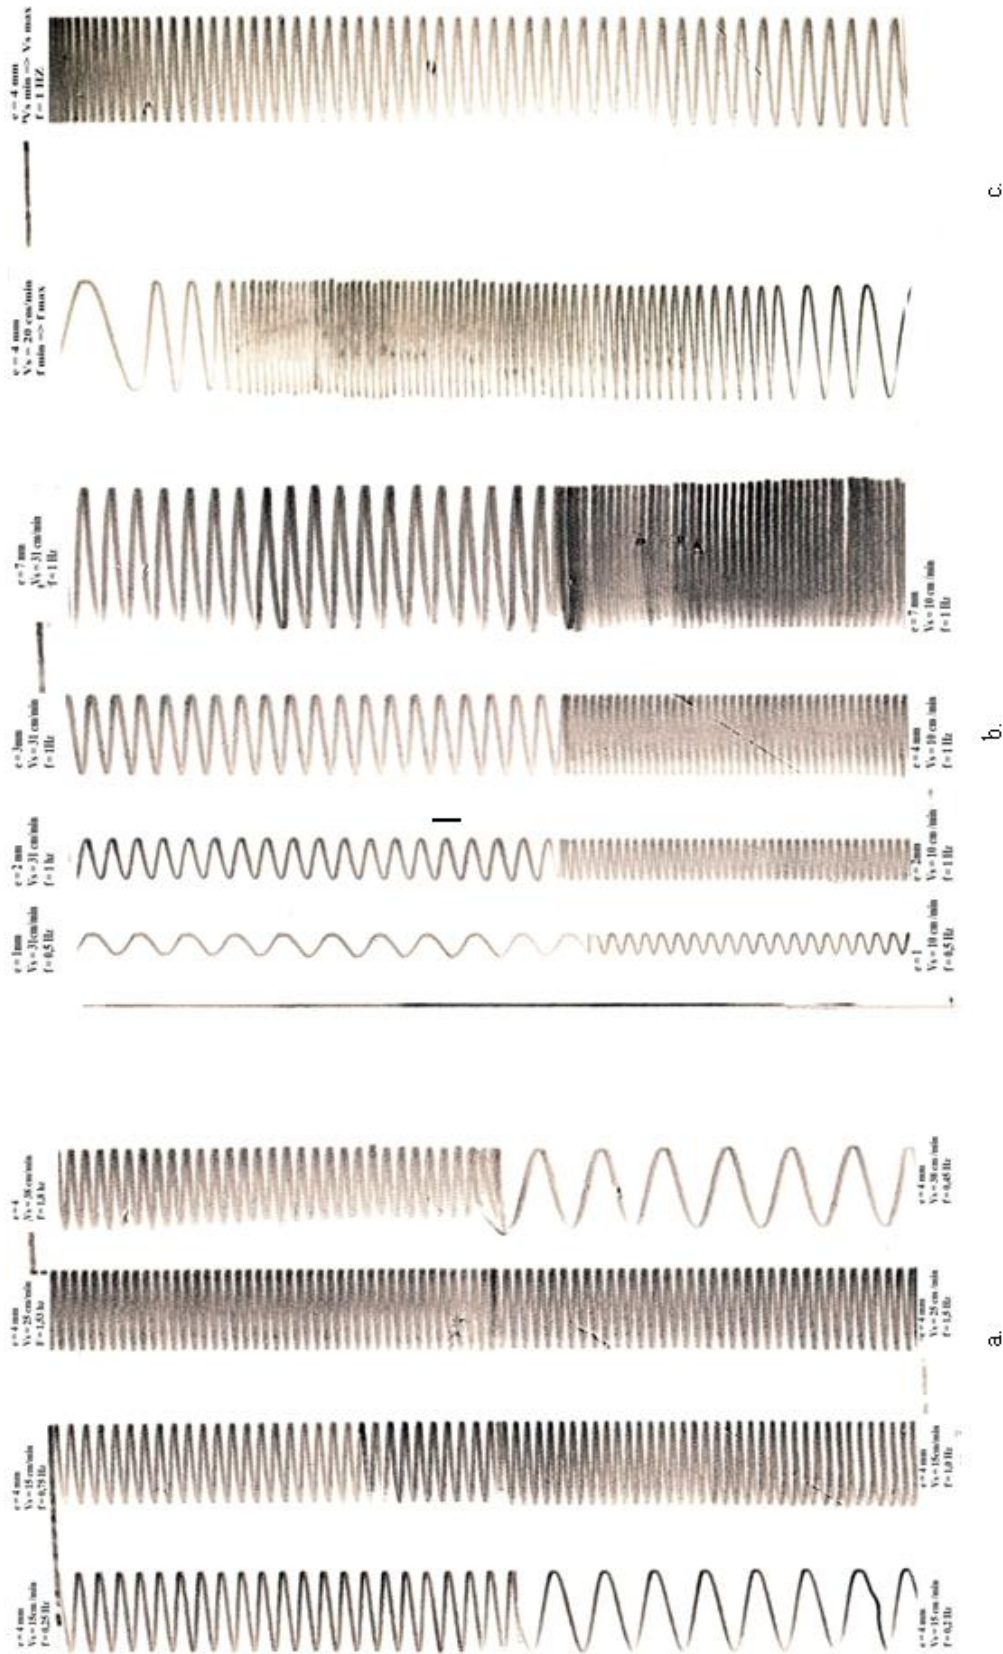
Experimental recording of swinging movement of the welding head: a when changing welding frequency and rate; b when changing eccentricity; c for extreme values of the welding frequency and rate.
